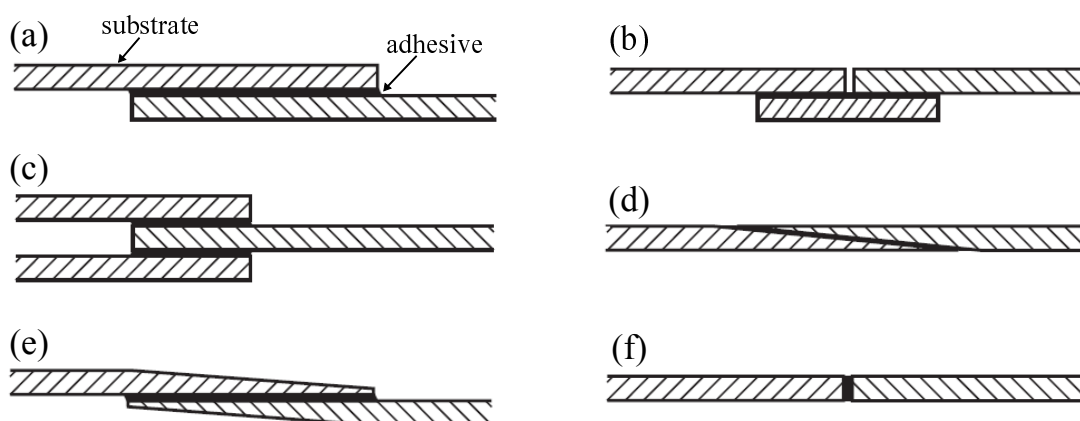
Sketches of common adhesive joint designs: (a) simple lap joint, (b) strap joint, (c) double lap joint, (d) scarf joint, (e) tapered lap joint, (f) butt joint. Adapted from (Hexcel, 2003).
